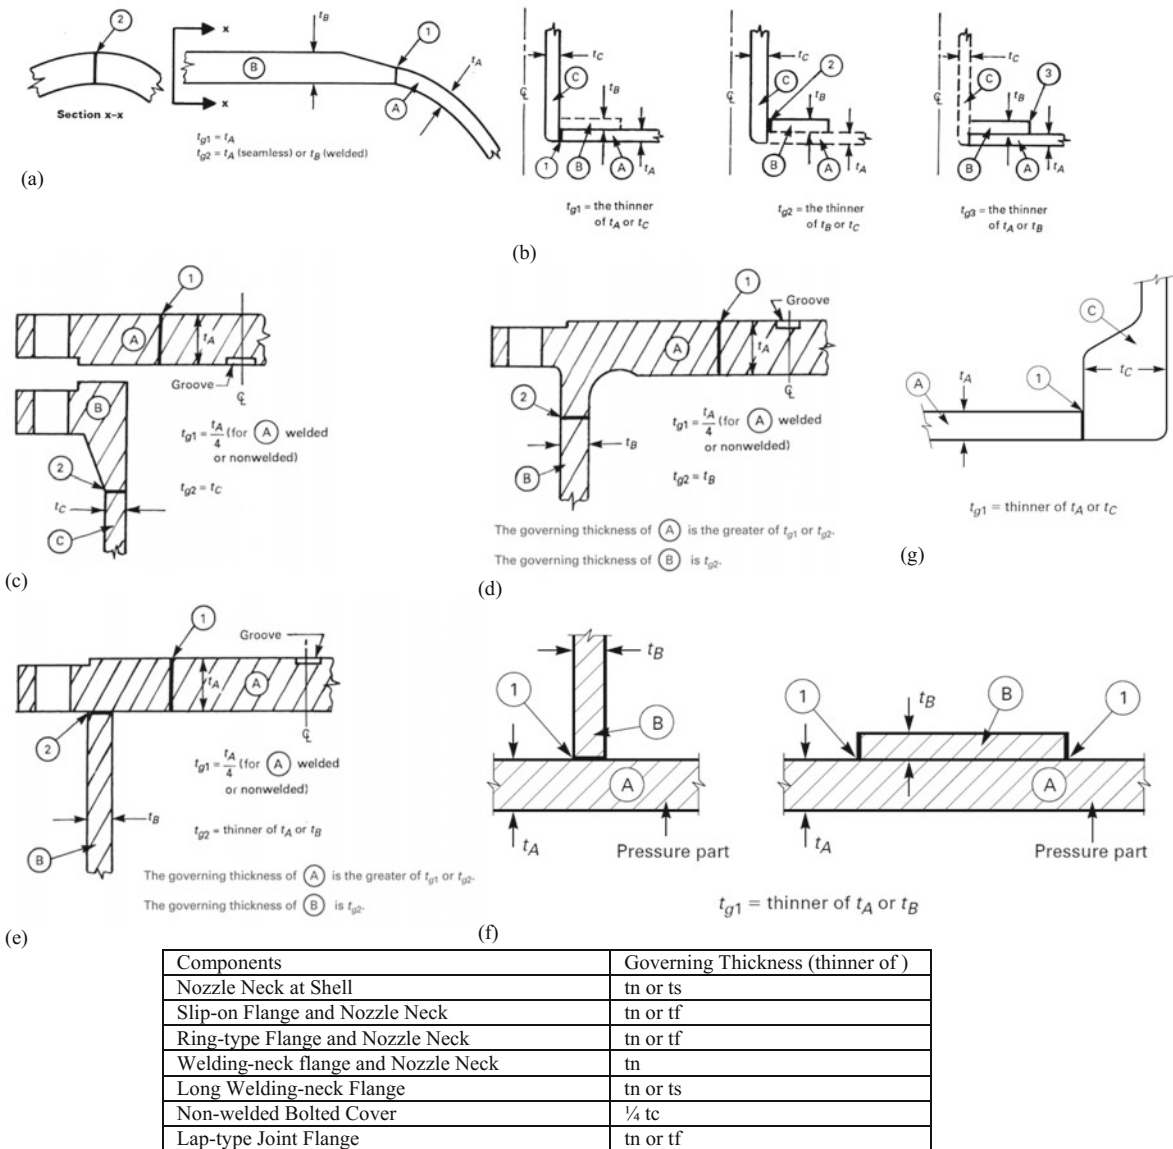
Governing thickness to define the impact test requirements in ASME Sec. VIII, Div.1 & Div.2. (a) Butt welded components. (b) Welded connection with reinforcement plate added. (c) Bolted flat head or tubesheet and flange. (d) Integral flat head or tubesheet. (e) Flat head or tubesheet with a corner joint. (f) Welded attachments as defined in UCS-66(a)
